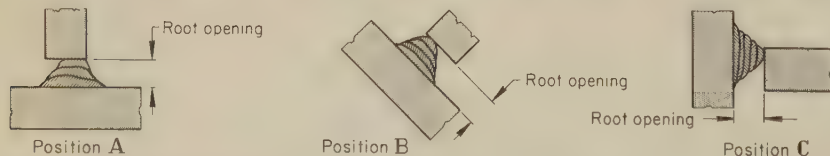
Shapes and dimensions of three joints for groove welding of sections over 4 in. thick
